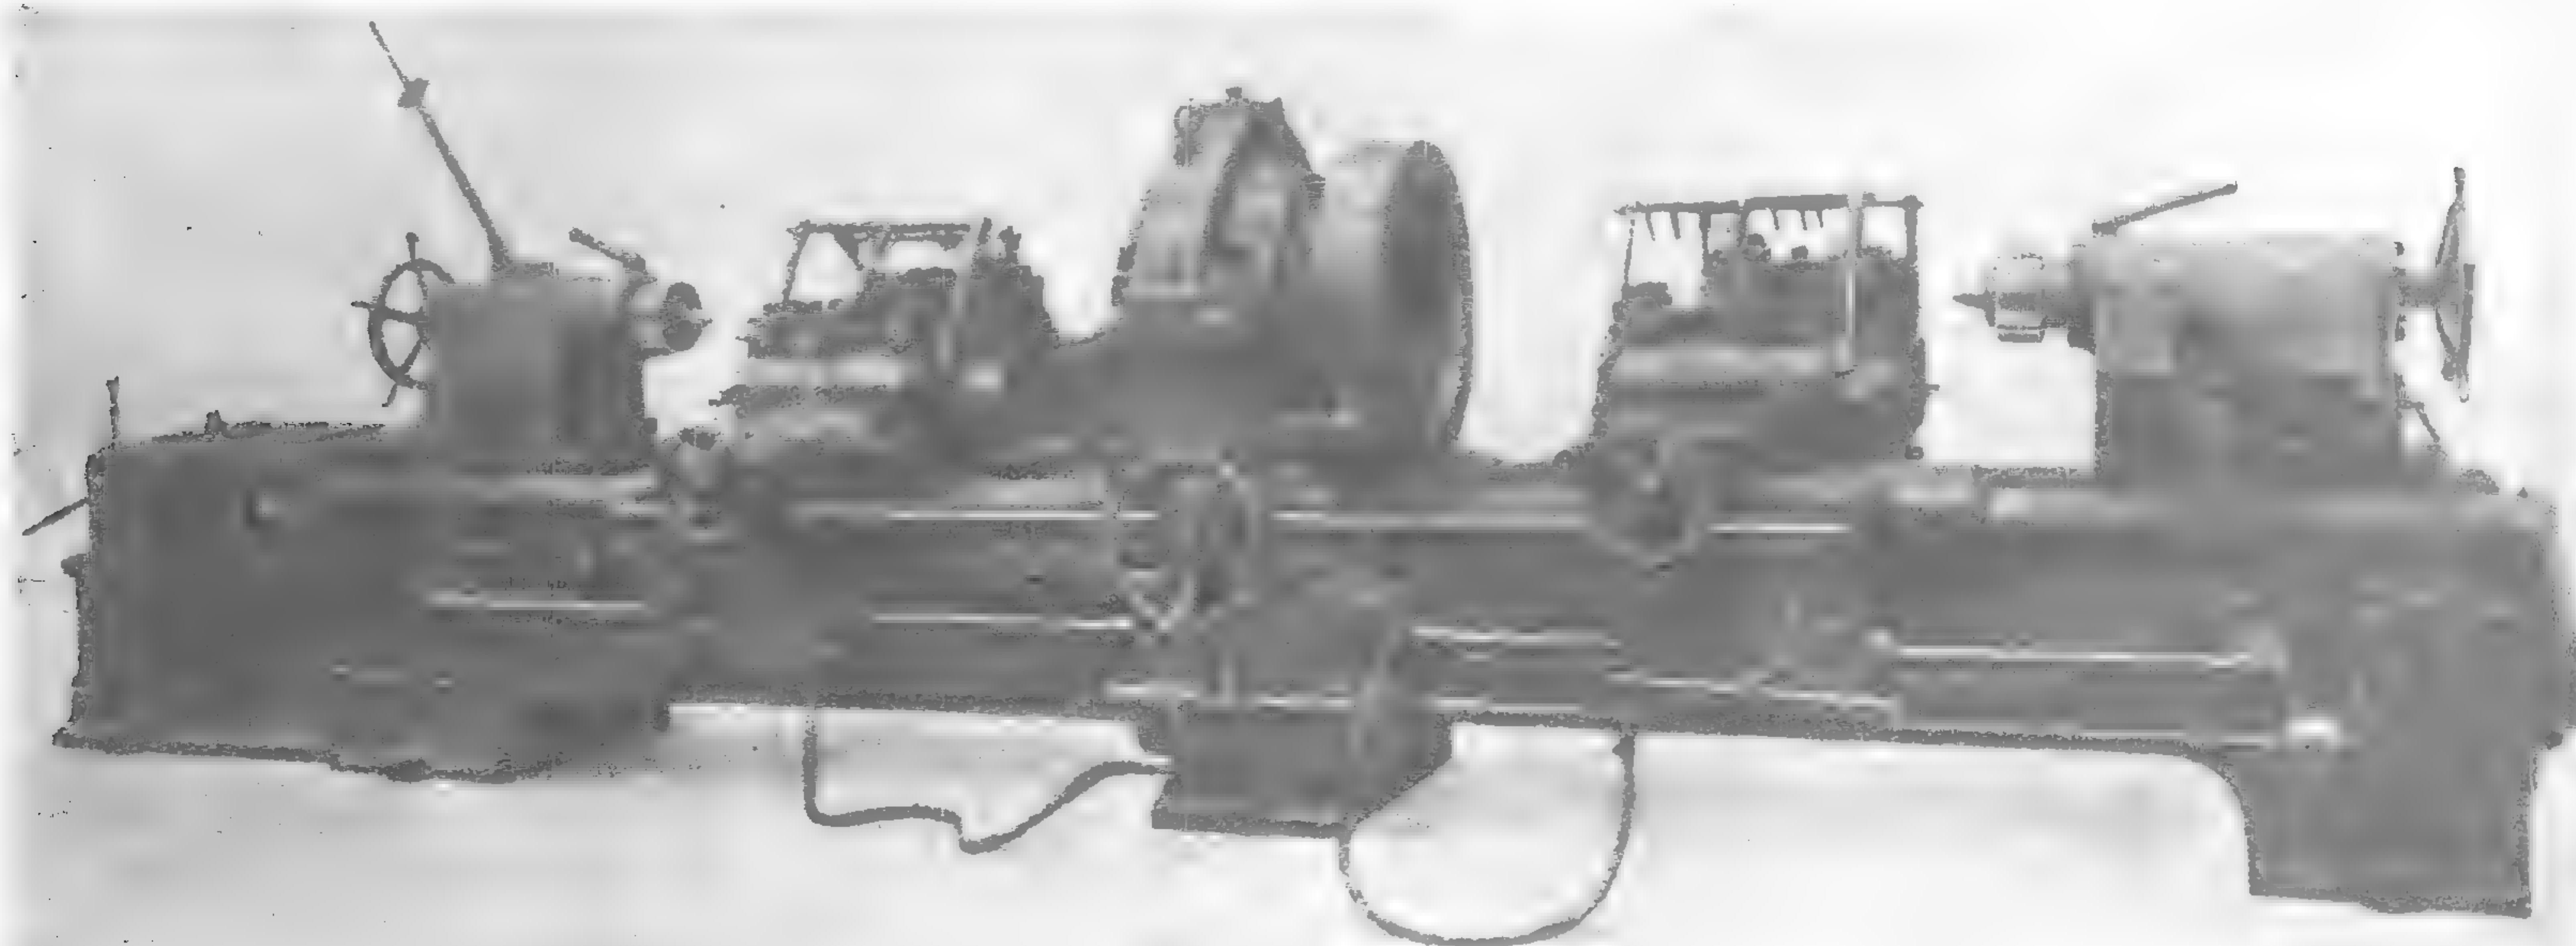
Axe Finishing Lathe with 20 h.p. Motor
